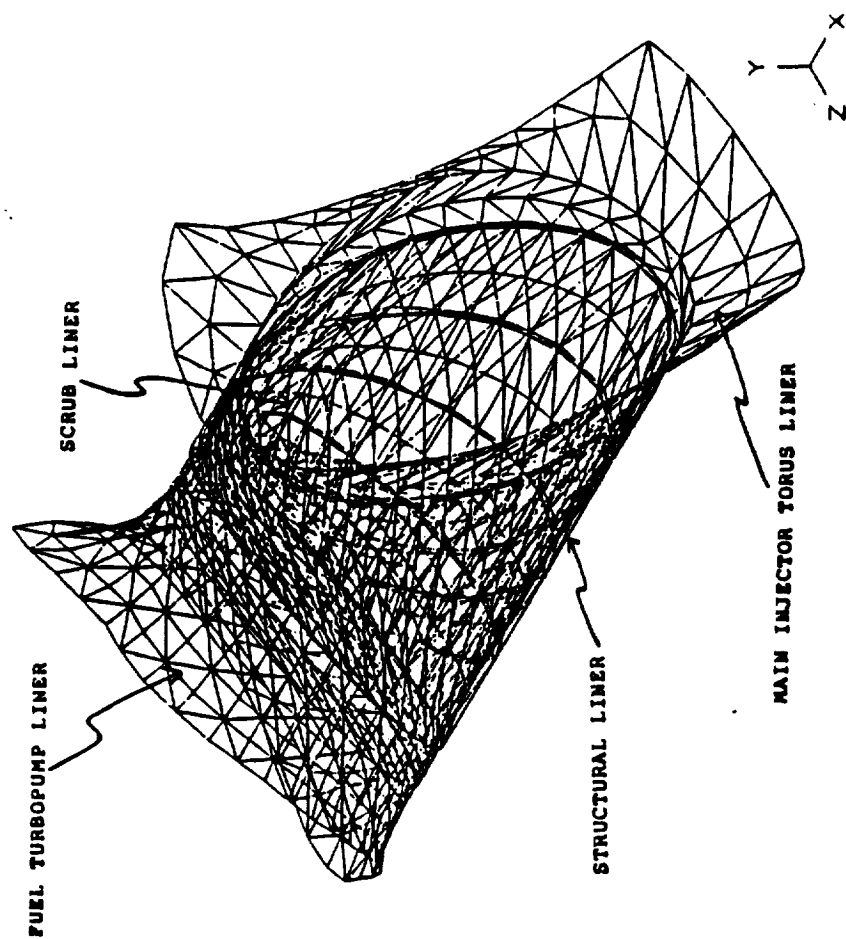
3-D Shell Model of the Fuel Transfer Tube Liner Assembly
